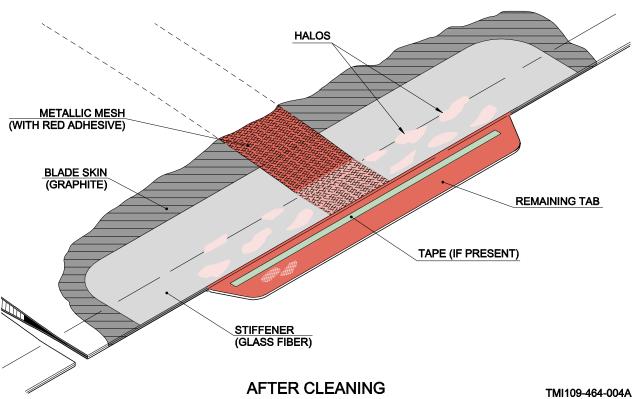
Main rotor blade - Replacement of the trim tab (blade skin cleaning).
